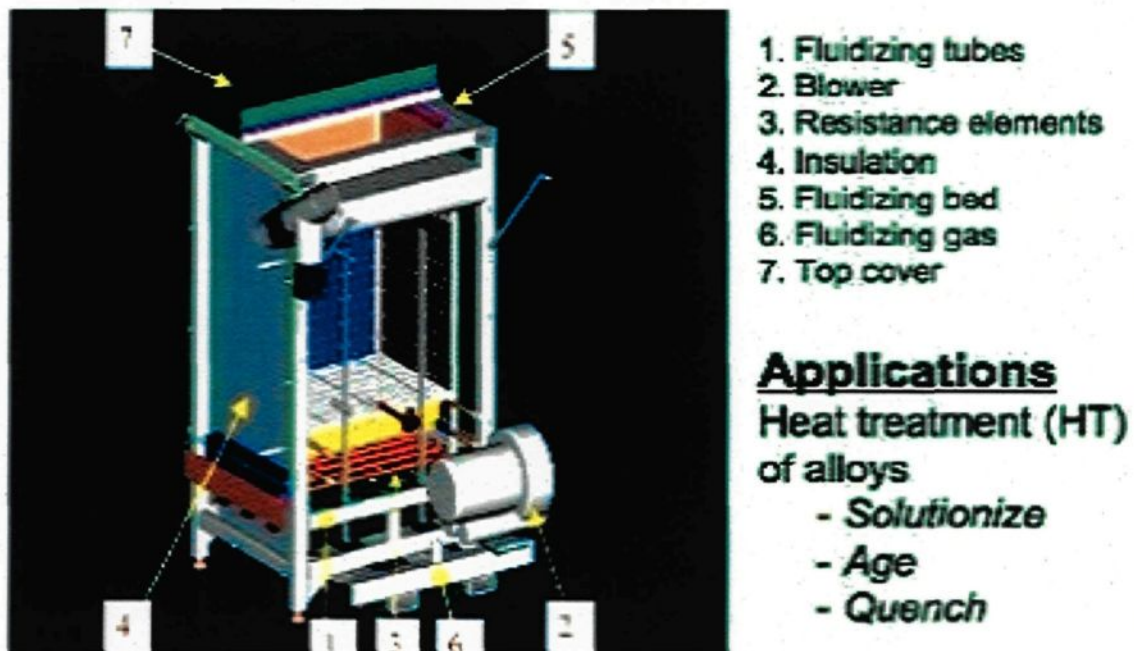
Schematic drawing for a fluidized bed technique. ¹²⁸
